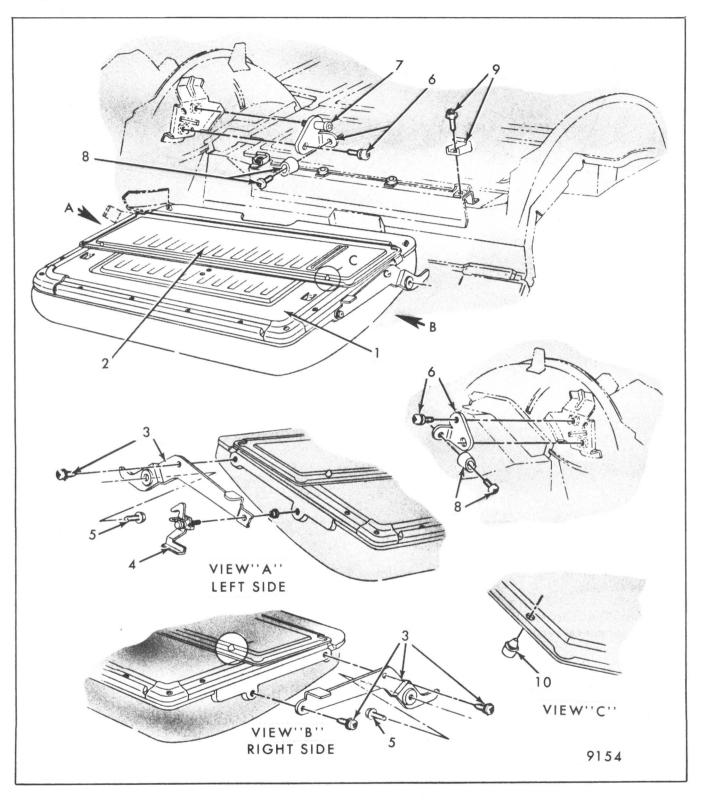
Folding Rear Seat Back and Lock Installation Assembly - "X-17" Styles
